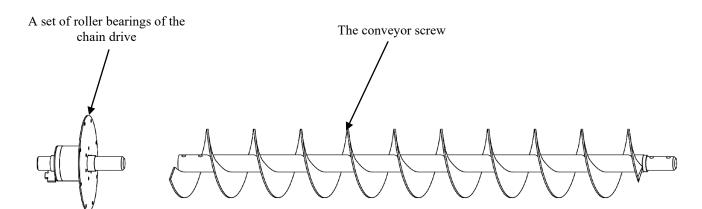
Installation of the conveyor screws and of a set of roller bearings of the chain drive.
